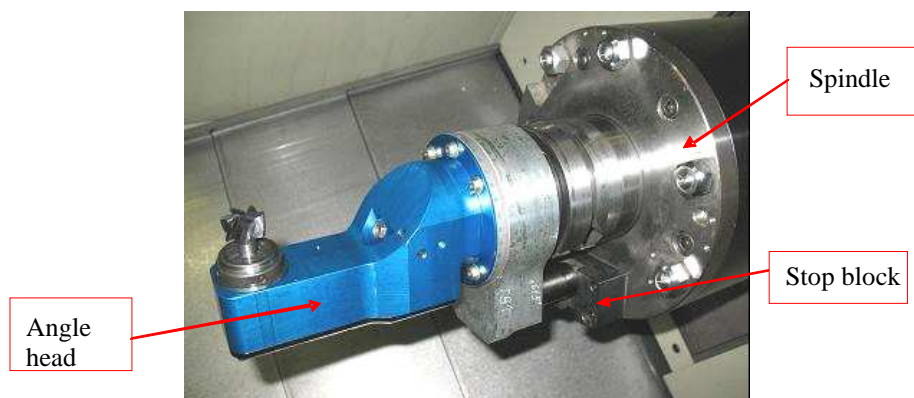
4-axis milling center spindle with „Stop block” and angle head
